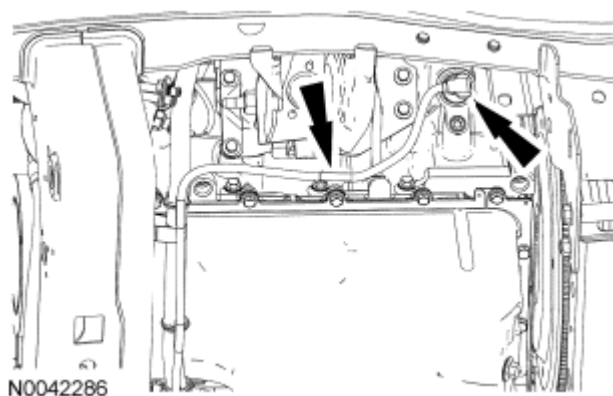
Locating Block Heater Electrical Connector And Wiring Harness Retainers
